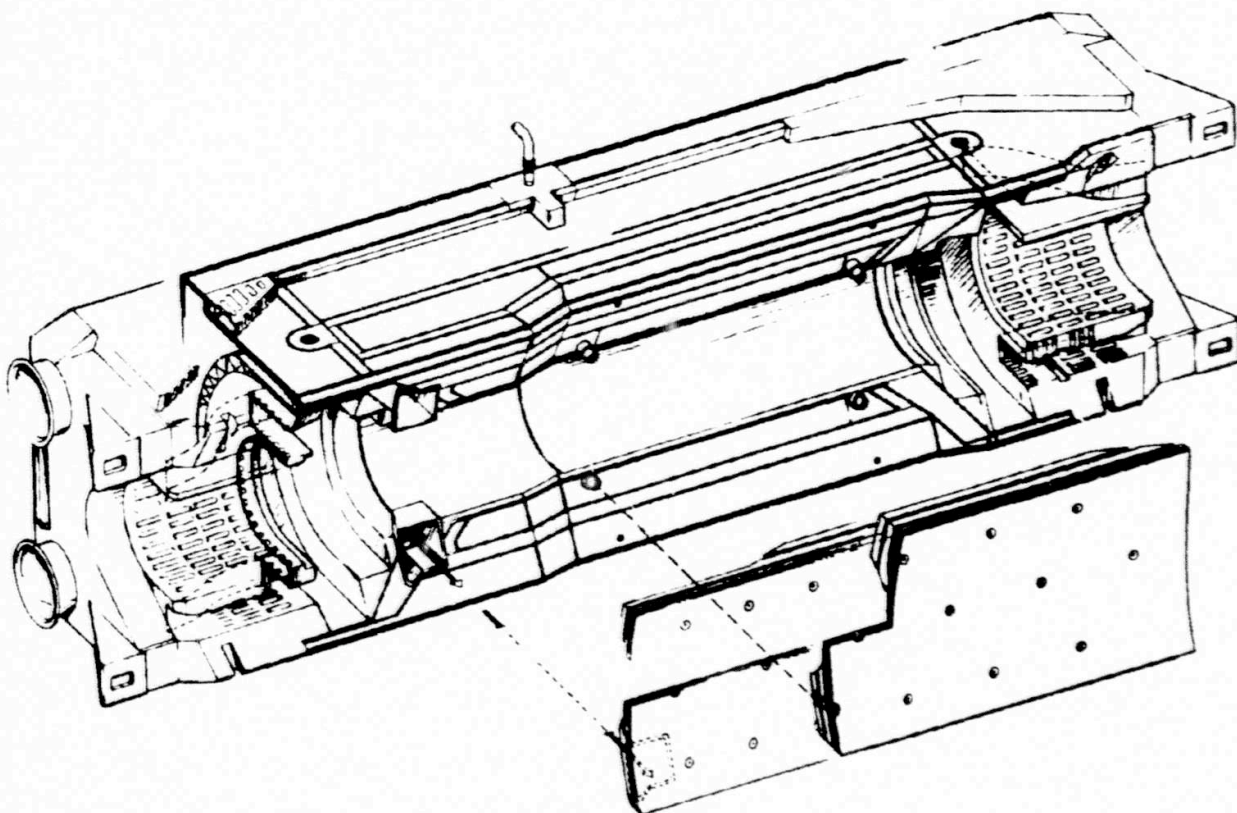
Bearing beam assembly (Dwg G-1435)
